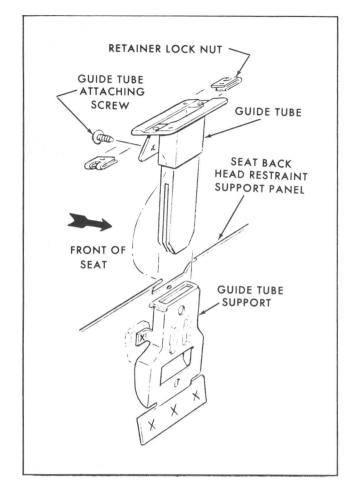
Head Restraint Guide Tube Typical of All Conventional Seats
